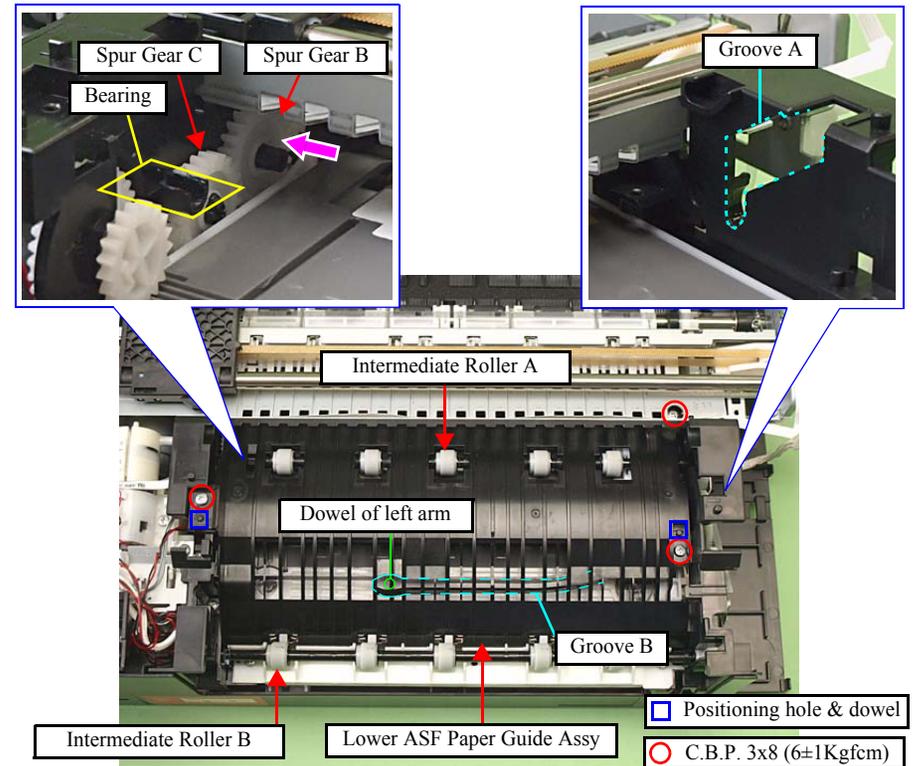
Removing the Lower ASF Paper Guide Assy (2)
